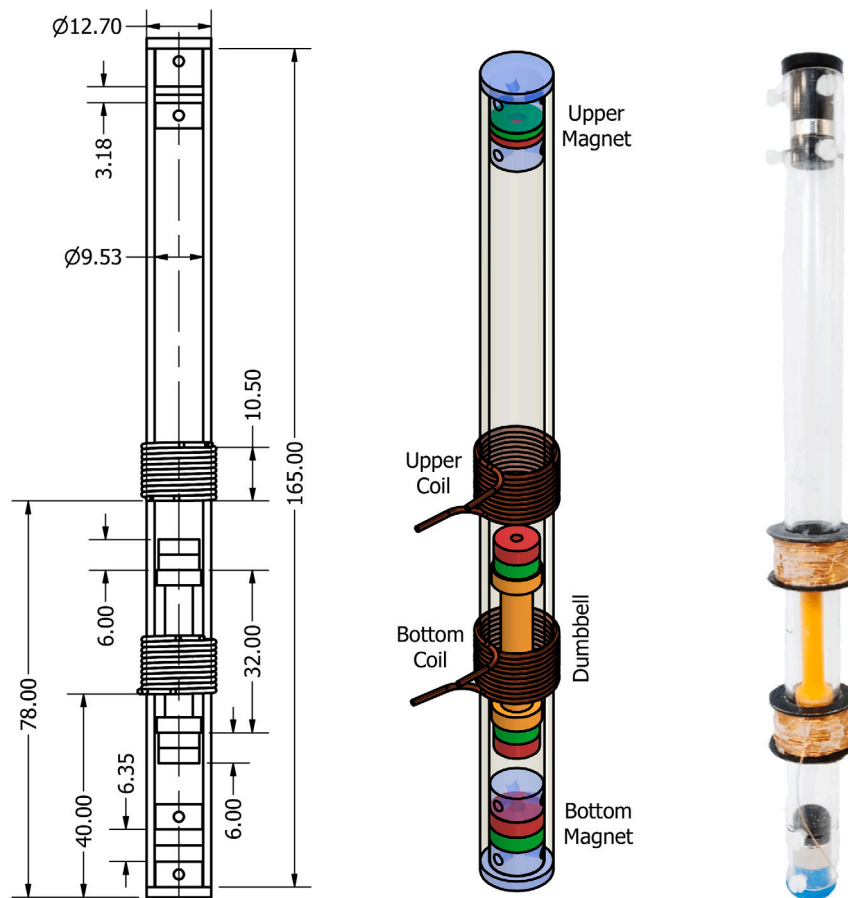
The dumbbell harvester is shown as a technical drawing (left), schematic illustration (middle), and an actual photo of the harvester (right). The polarity of the magnets is indicated by the red/green color. On the right, the dumbbell is partly obscured by the coils. The dimensions of the harvester can be found in Table 1. (For interpretation of the references to color in this figure legend, the reader is referred to the web version of this article.)
